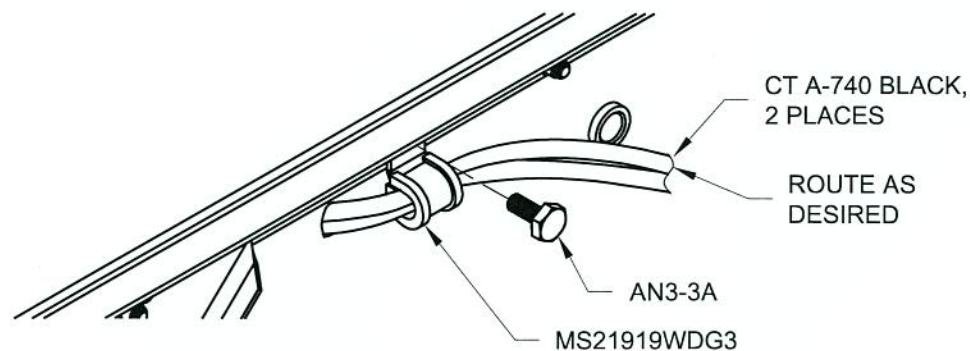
CLAMPING THE CABIN HEAT CABLES TO THE AFT SIDE OF THE FIREWALL
